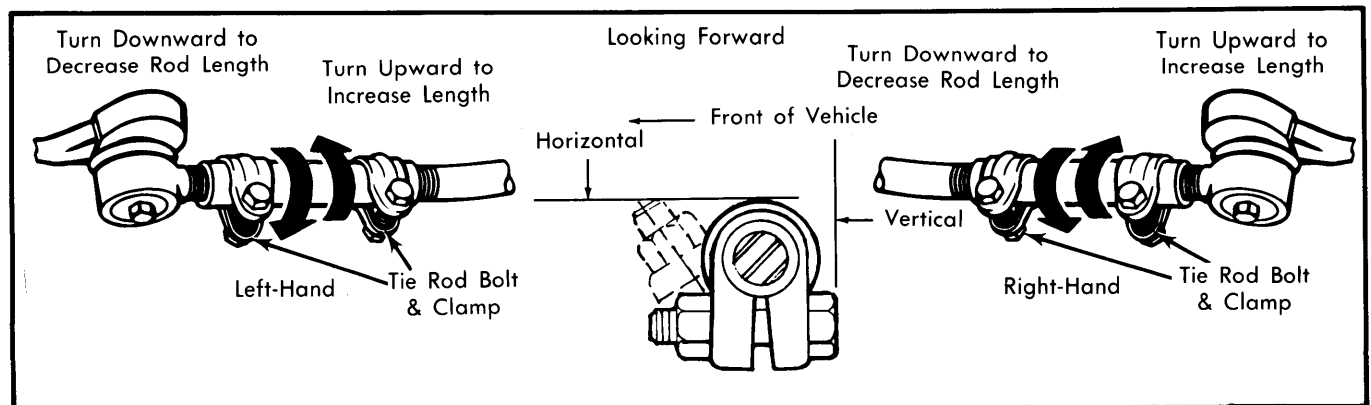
Tie Rod Clamp & Bolt Position Rear Wheel Drive Vehicles
